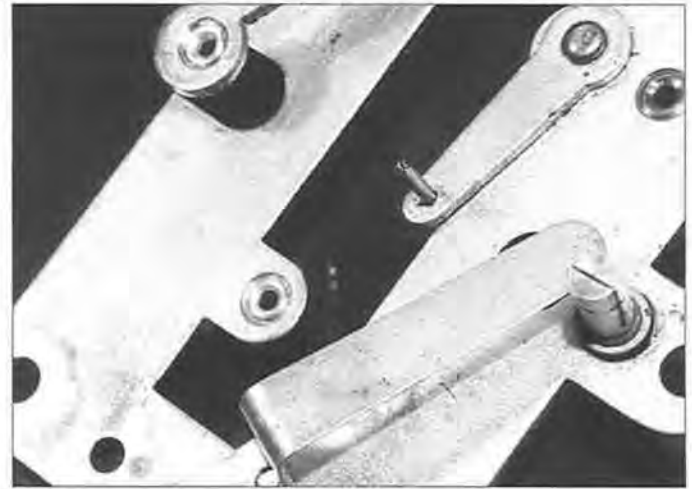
Inspect the pivot holes. These are lathe-turned bushings about 40 years old. The anchor-keeper may need adjustment.
